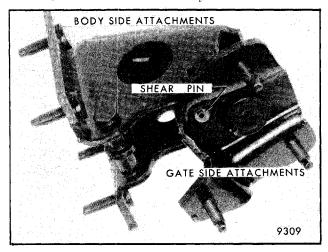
Tailgate Left Lower Hinge Assembly
